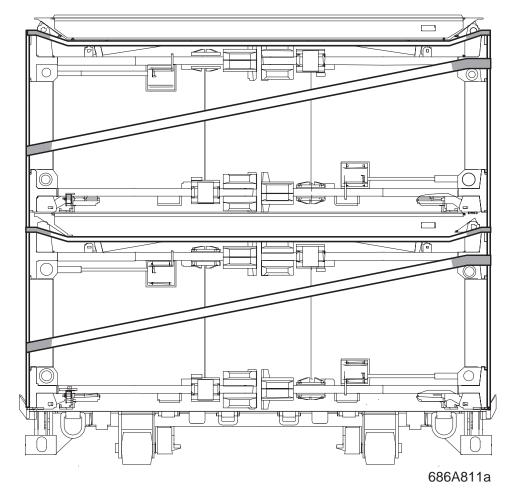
65 Flatrack Load T2 End Lashing Arrangements
